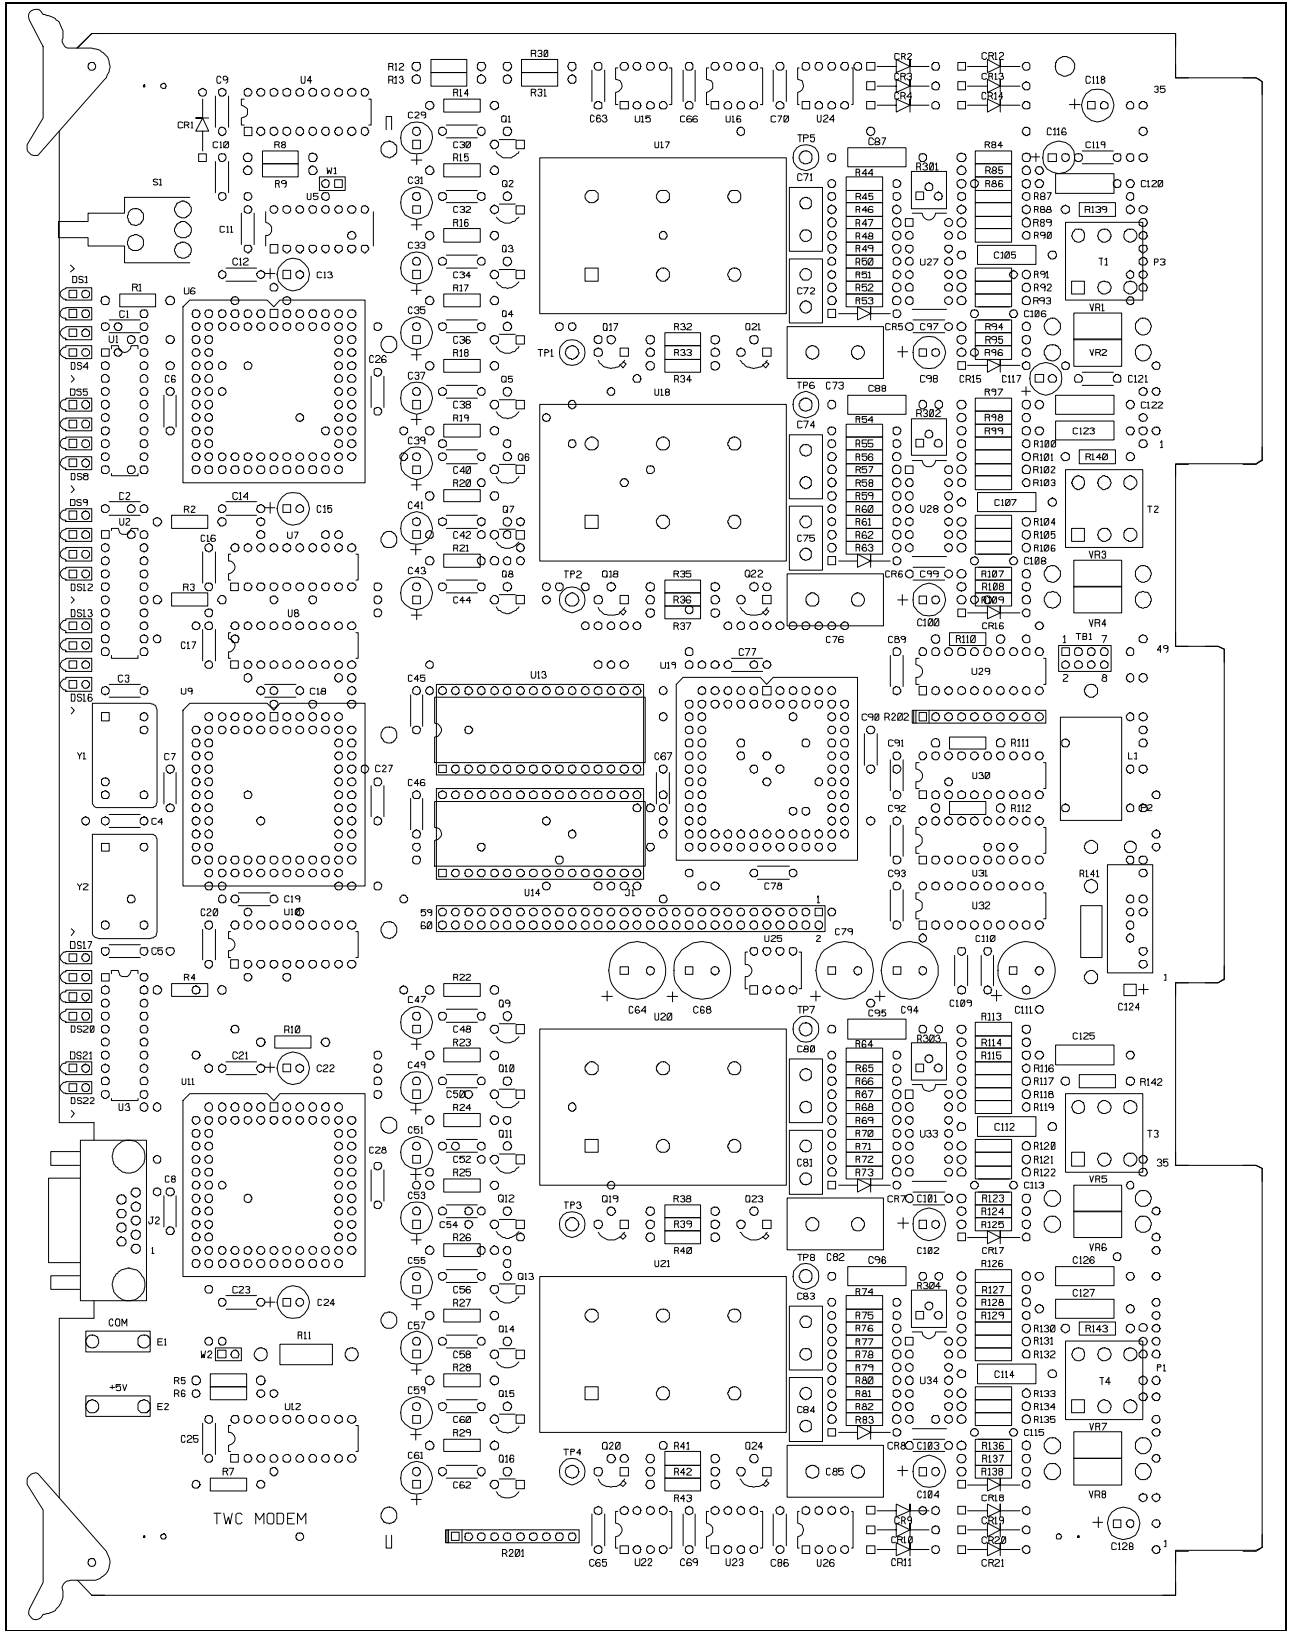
NVTWC-MOD Board, P/N 31166-099-00
